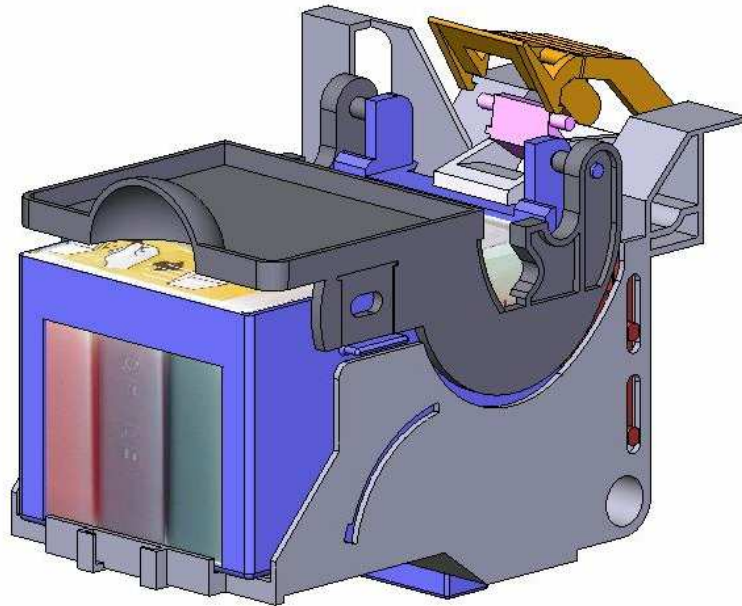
(a) Assembly drawing of an ink cartridge holder
